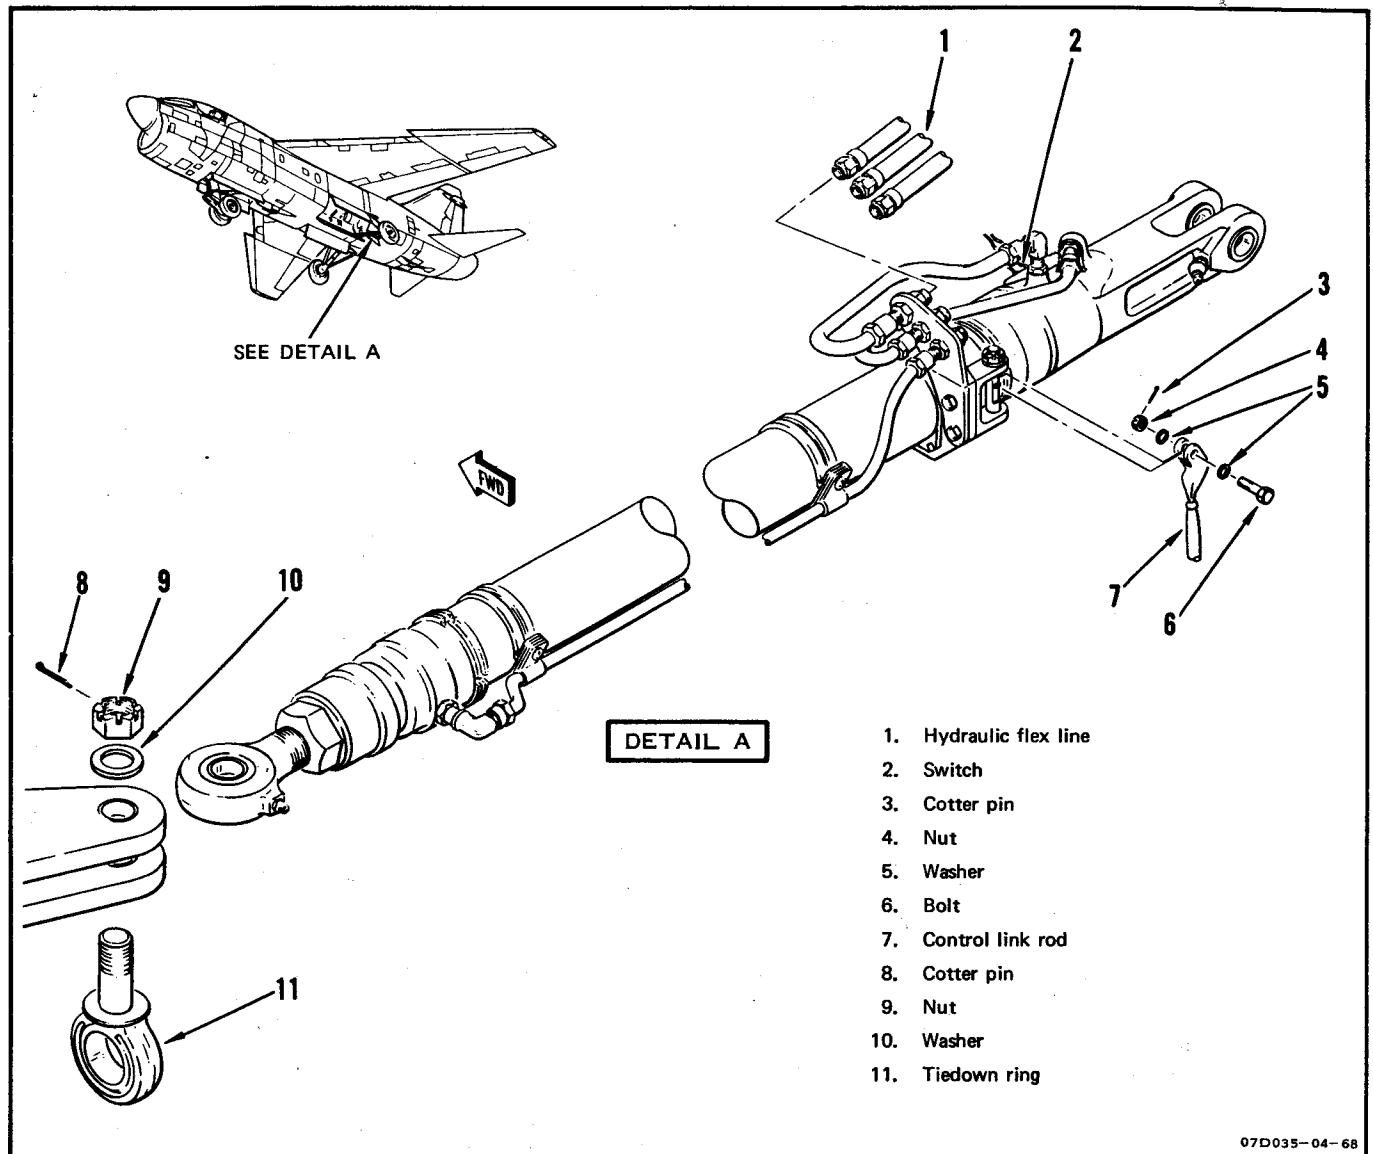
Main Gear Actuating Cylinder Removal and Installation
